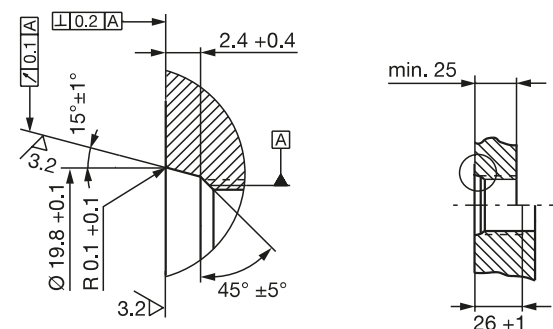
Mounting hole M18x1.5 per ISO 6149 O-ring 15.4x2.1
